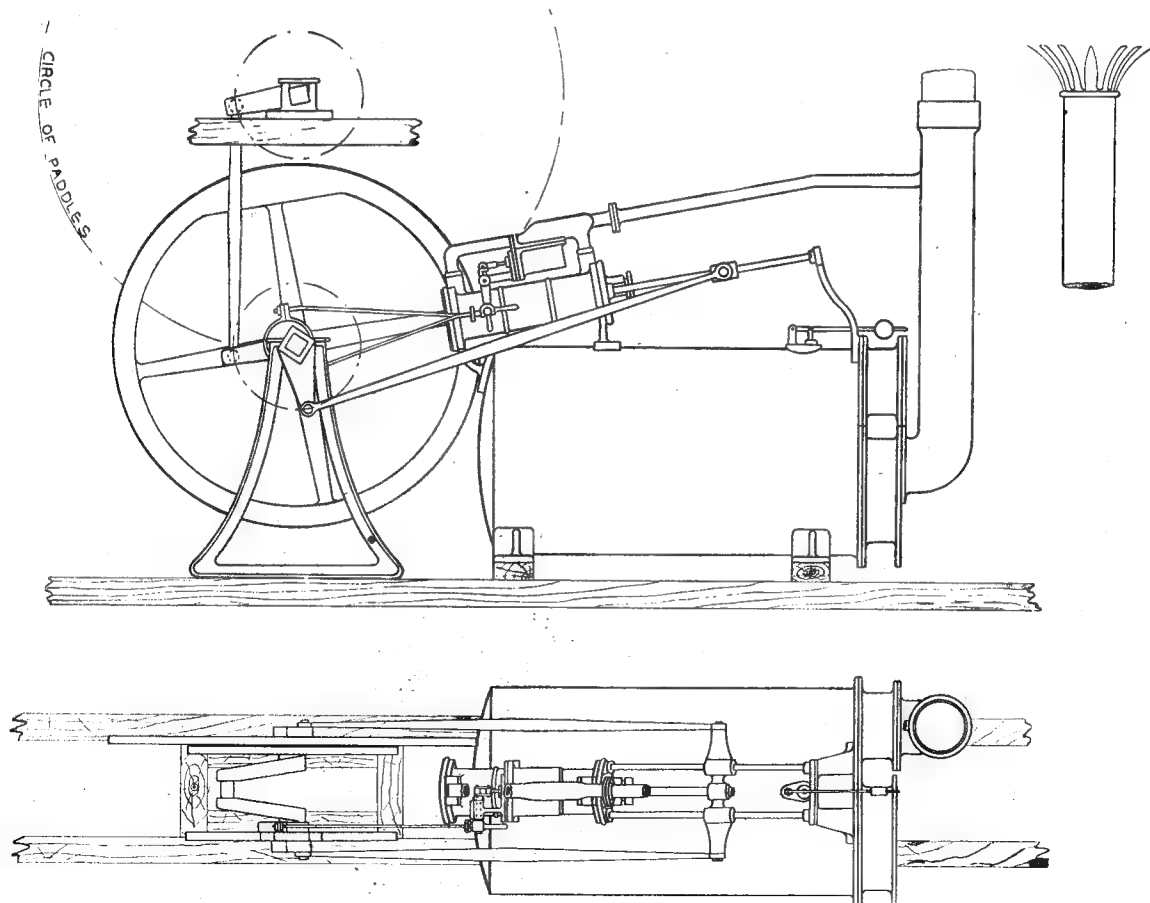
Probable layout of the 8 in. by 30 in. Trevithick-Murray engine in steam Privateer "L'actif"—1813
